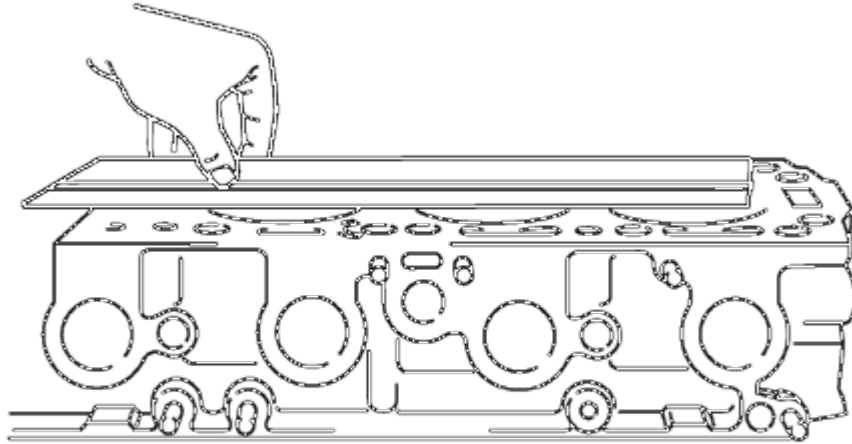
Inspecting Engine Block For Sag In Length And Width On Sealing Surfaces
